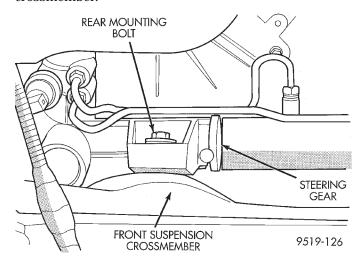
Steering Gear Rear Mounting Isolator Bolt
